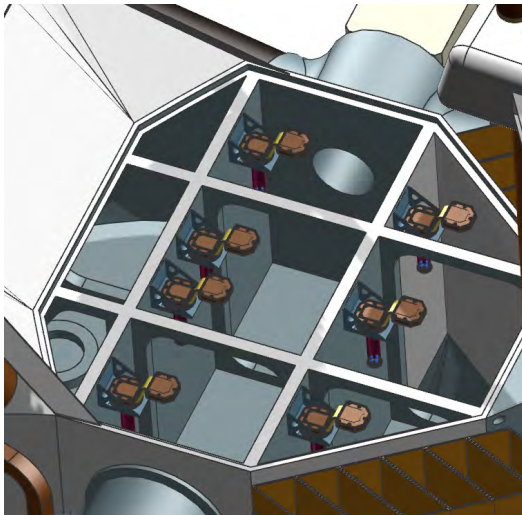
Detail of the heat switch and flexible strap mounting assembly.
